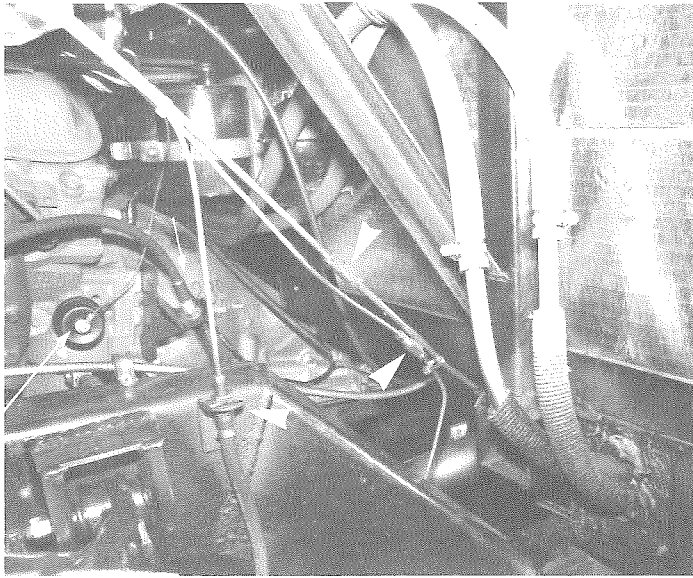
Upper Air Deflector Removal: Remove the four equally spaced rivets that fasten the air deflector to the cross-member that supports the top side of the radiator. These are 4 AD45 H pop rivets, .251-.312 grip length, .129-.133 hole diameter.
